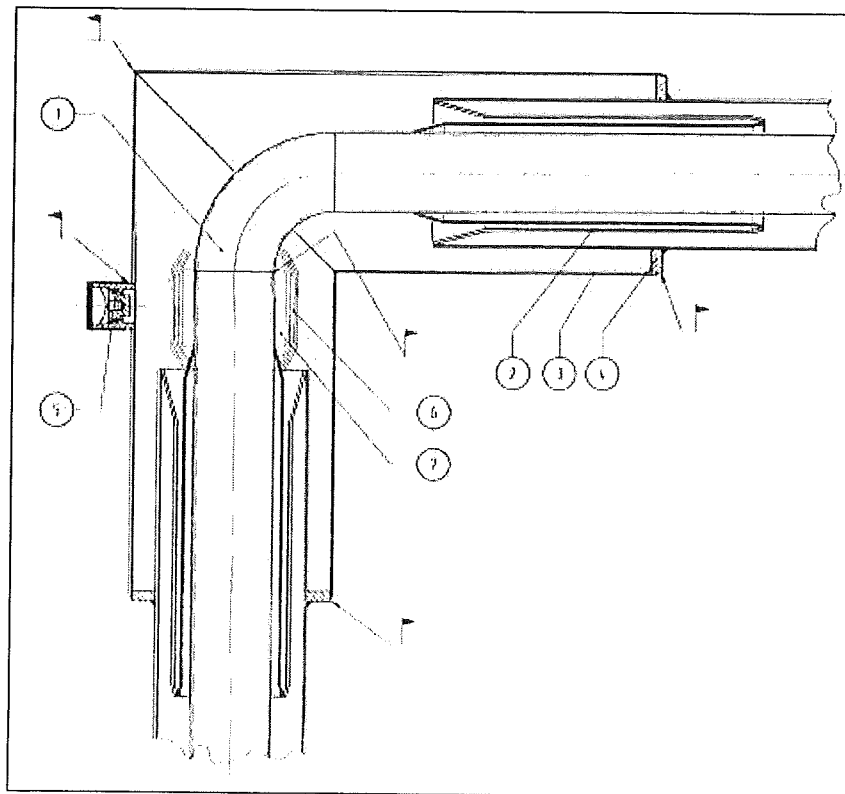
90° welded coupling DeMaCo Holland bv
